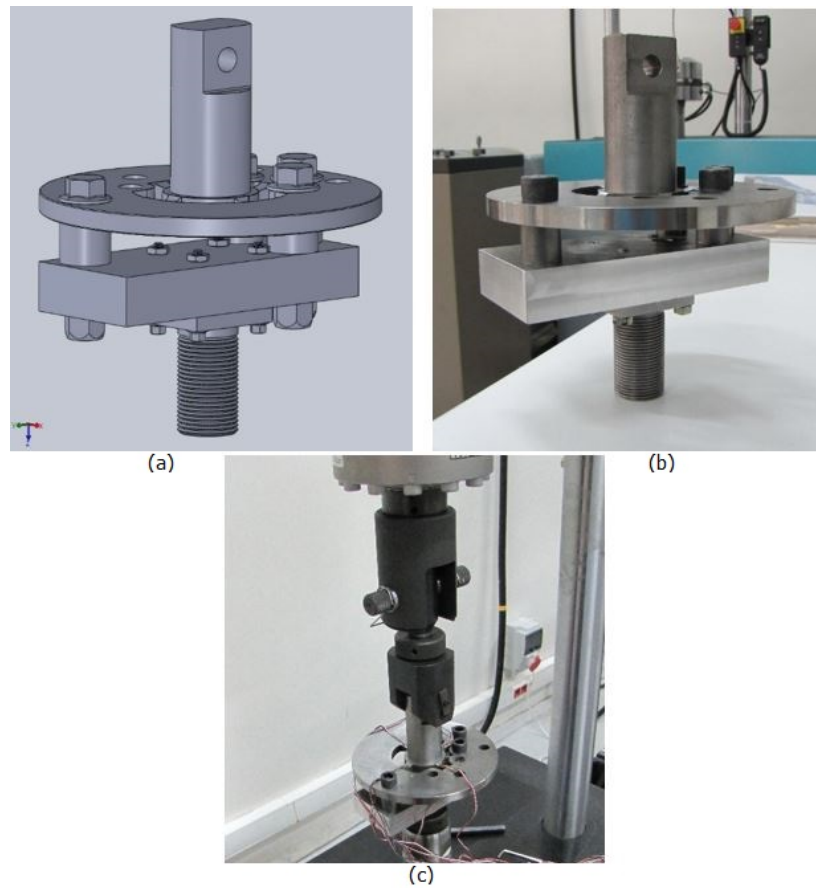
Assembly for applying load in z direction, (a) Illustration of the fixture in Solidworks 3D, (b) Fixture assembly and (c) Assembly of the fixture on the tensile testing machine.
